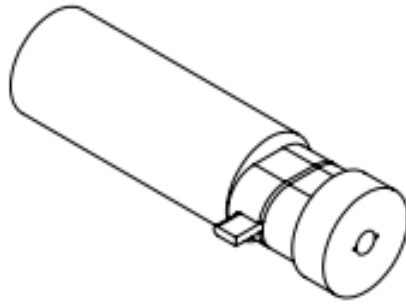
Wire holder that is attached to a lathe to wind a coil.
